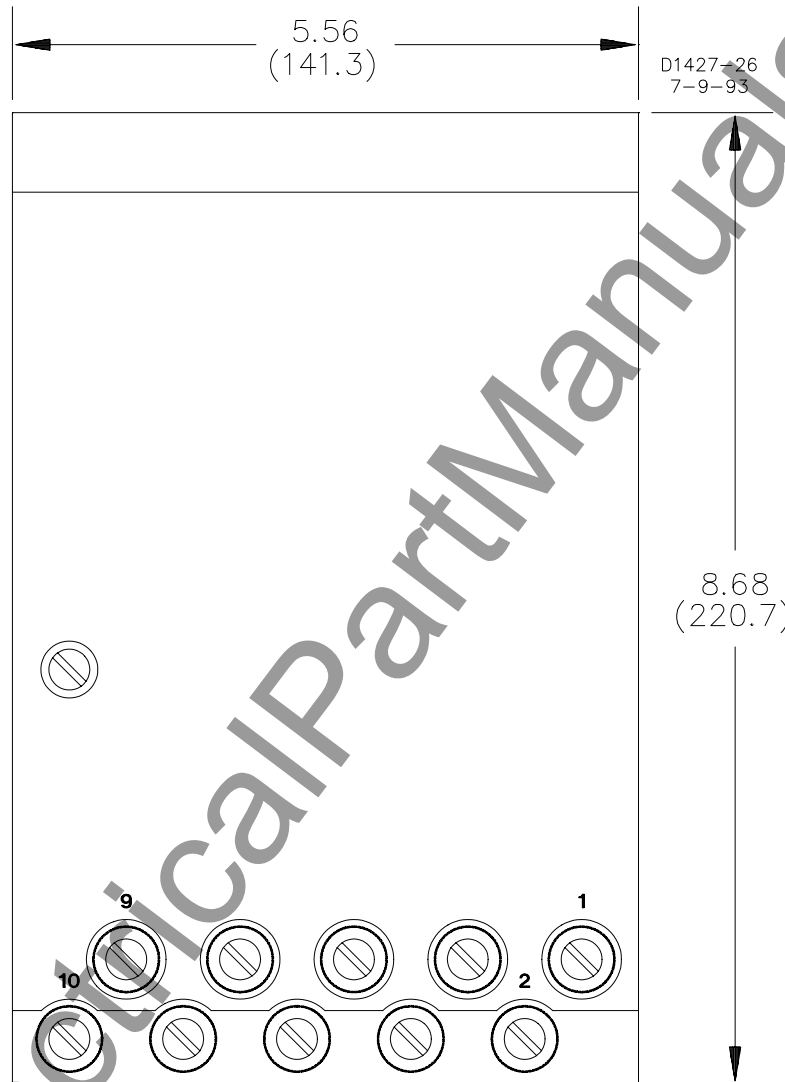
S1 Case, Single-Ended, Semi-Flush Mounting, Outline Dimensions, Rear View
